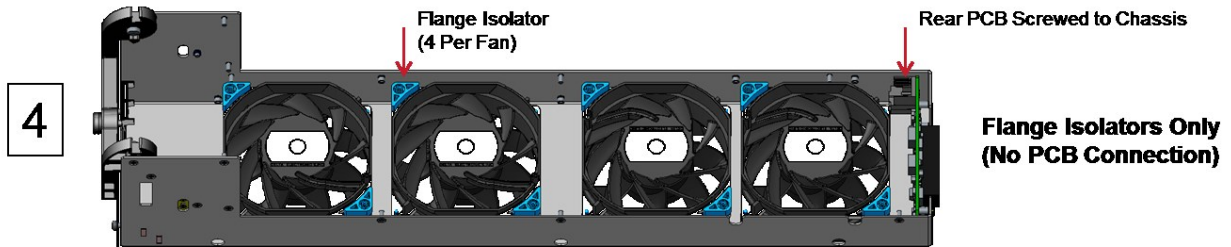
GEN2A with AHBM Test Case #4: Flange Isolators (Float PCB)
